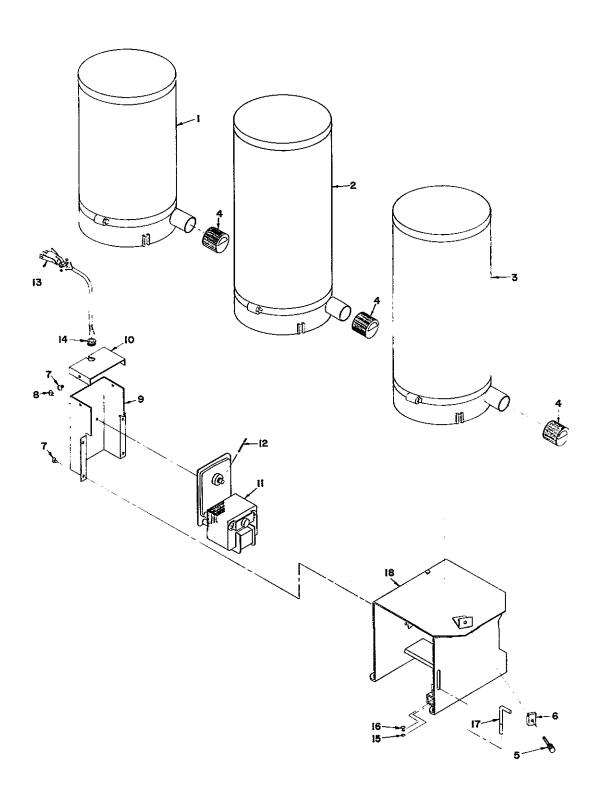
SUGAR, CREME AND TEA CANISTER AND STAND ASSEMBLY
